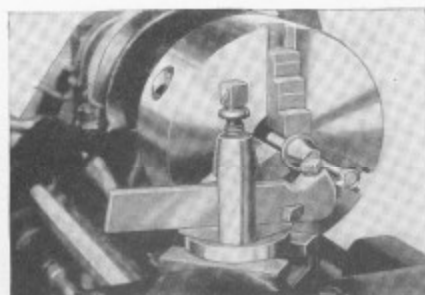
Facing the end of Ford Mushroom end type Valve Stem for Clearance.
